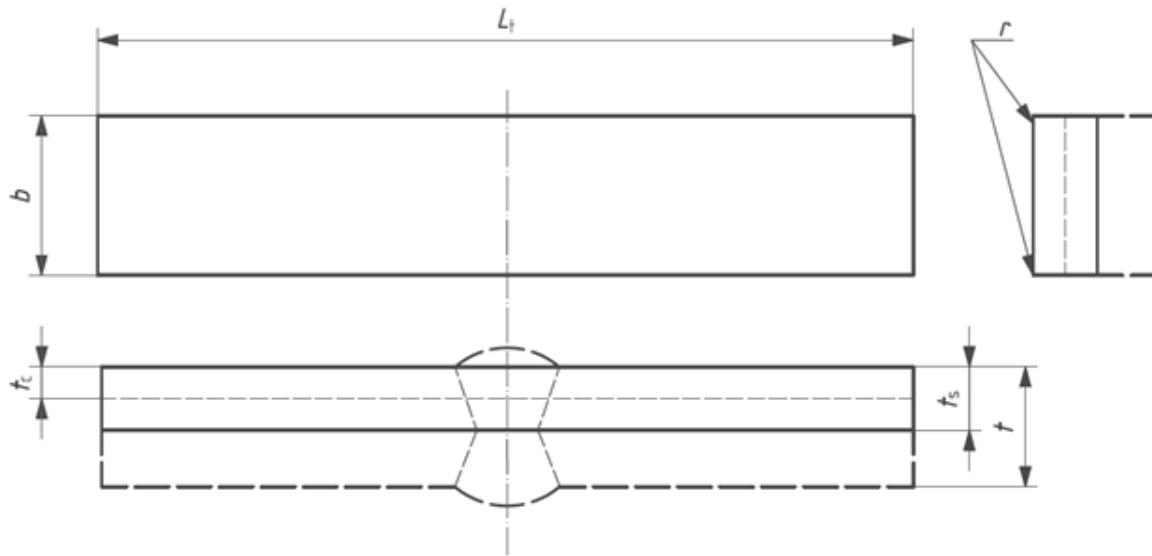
Face bend test specimen for cladding with a butt weld (FBCB).
